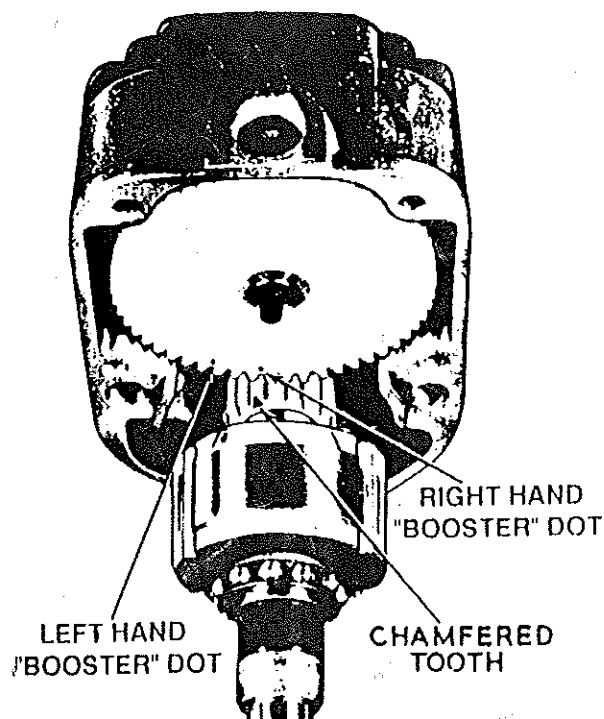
Correct Meshing of Distributor and Drive Gears Counterclockwise S6LN Type Magneto with Retard Contact
